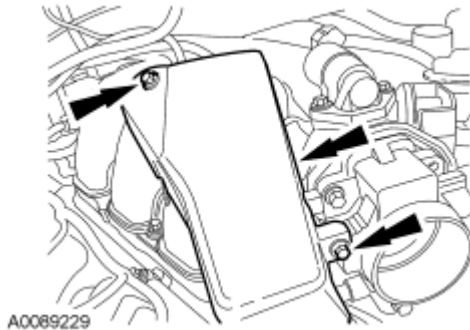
Locating Accelerator Cable Snow Shield Bolts
